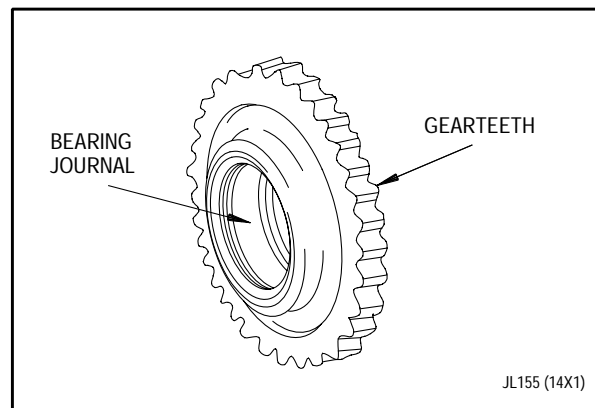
Gearbox Spur Gear (Gearbox Idler Gearshaft) - Repair
